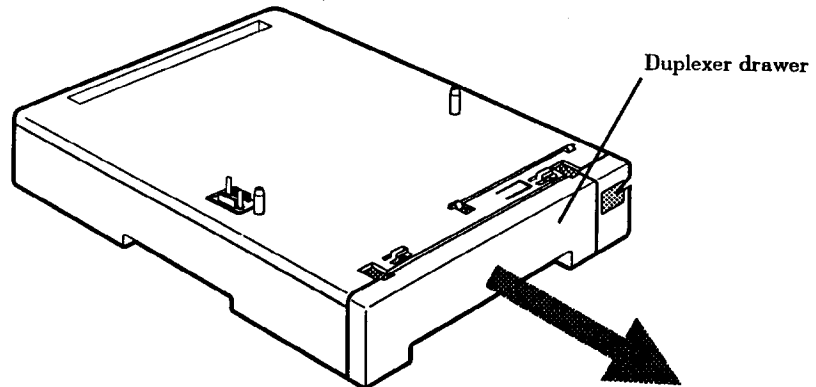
REMOVING THE DUPLEXER FROM PRINTER
